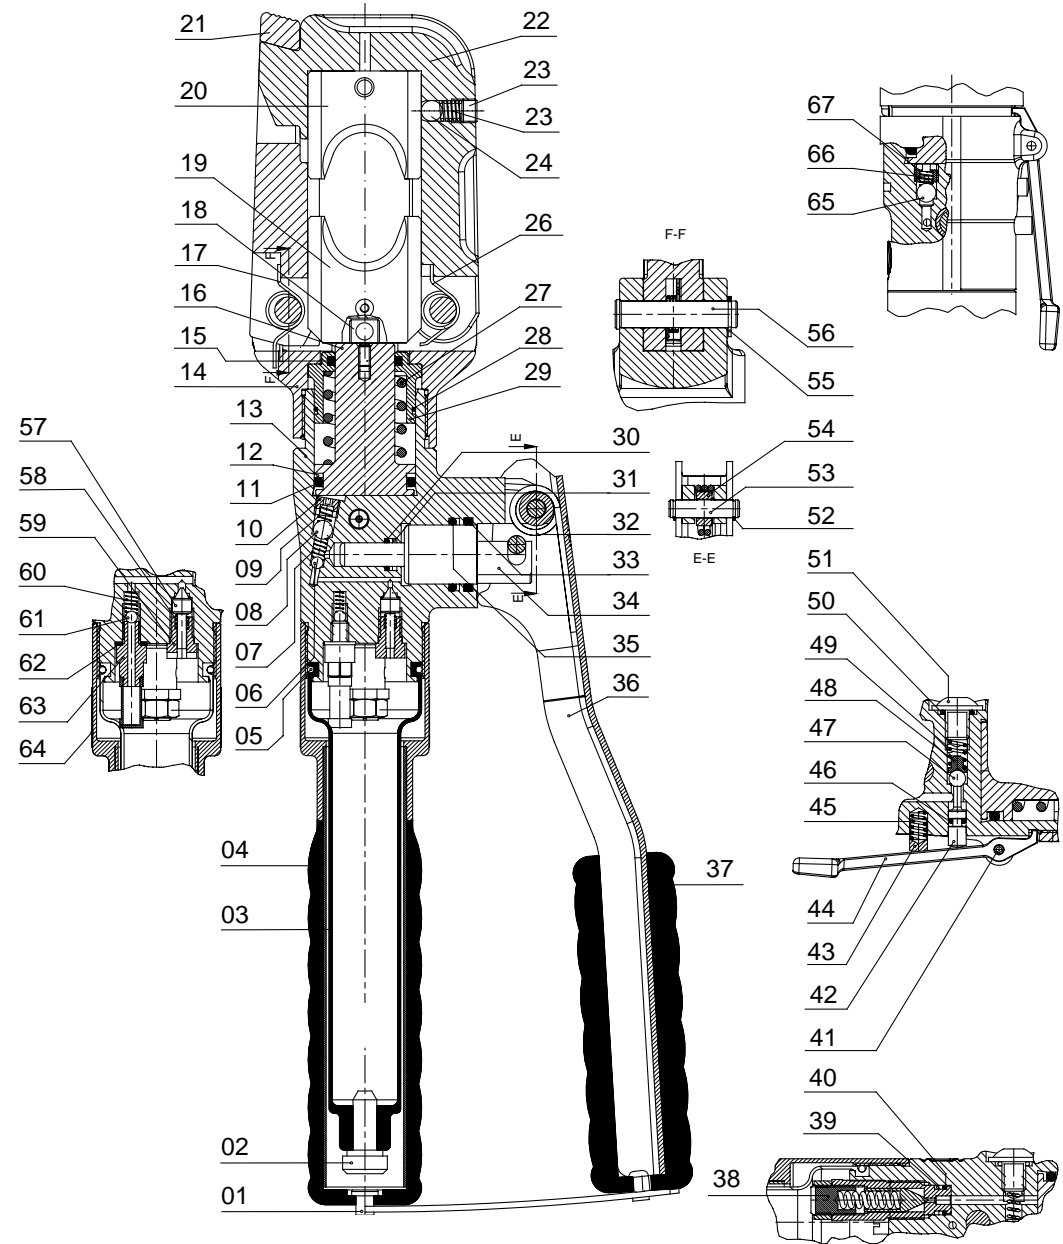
LONGITUDINAL SECTION VIEW - COUPE LONGITUDINALE
